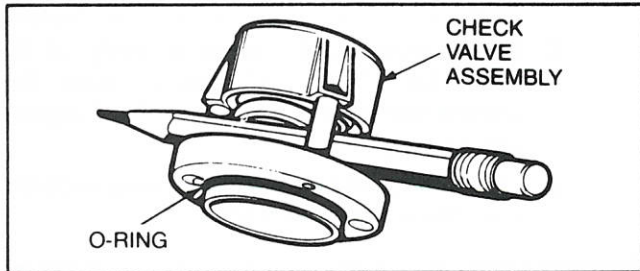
CLEANING 3/4" AND 1" CHECK VALVE
